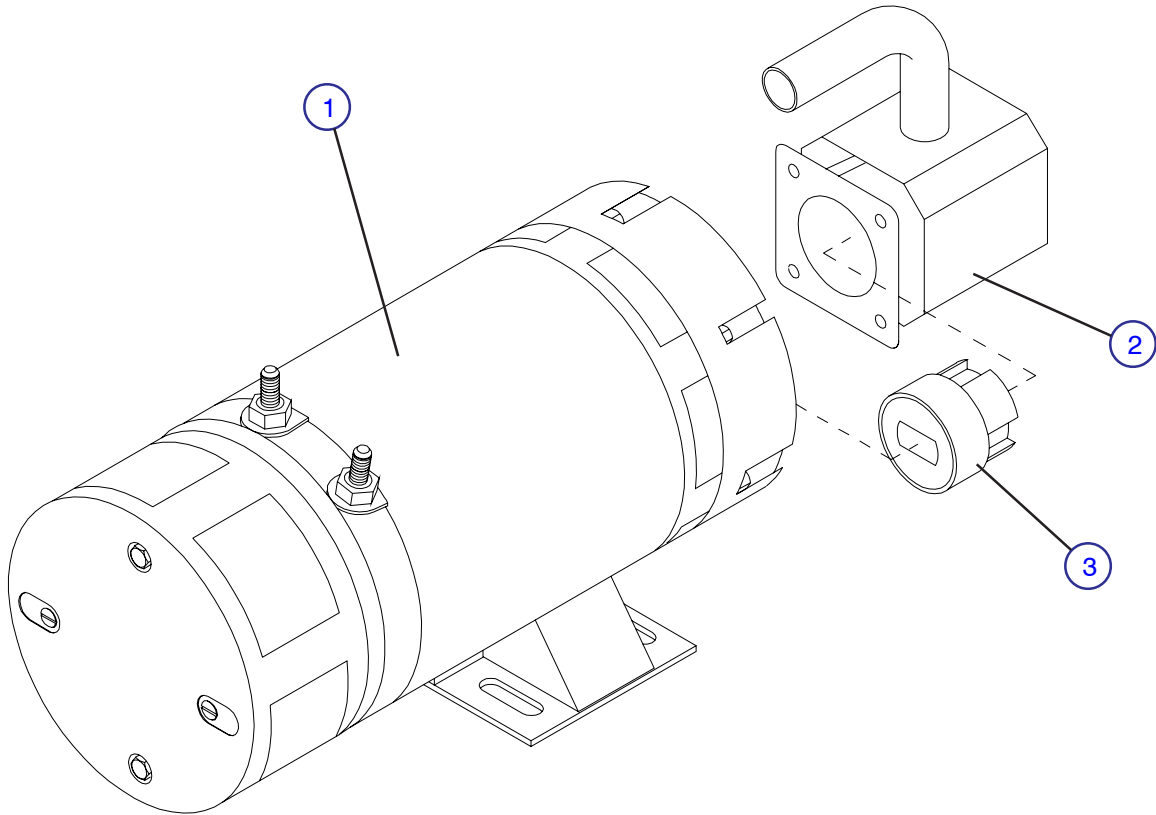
A. PUMP AND MOTOR ASSEMBLY
